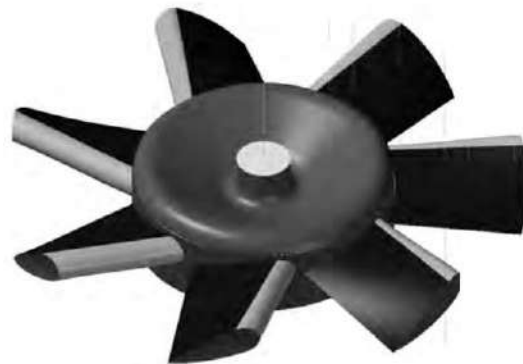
Blending of surfaces to provide smooth transitions in complex engineering components
